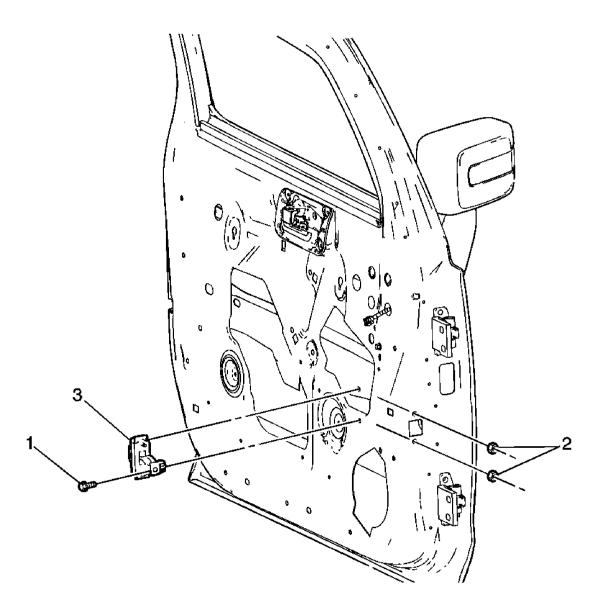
Replacing Front Door Check Link Courtesy of GENERAL MOTORS CORP.
